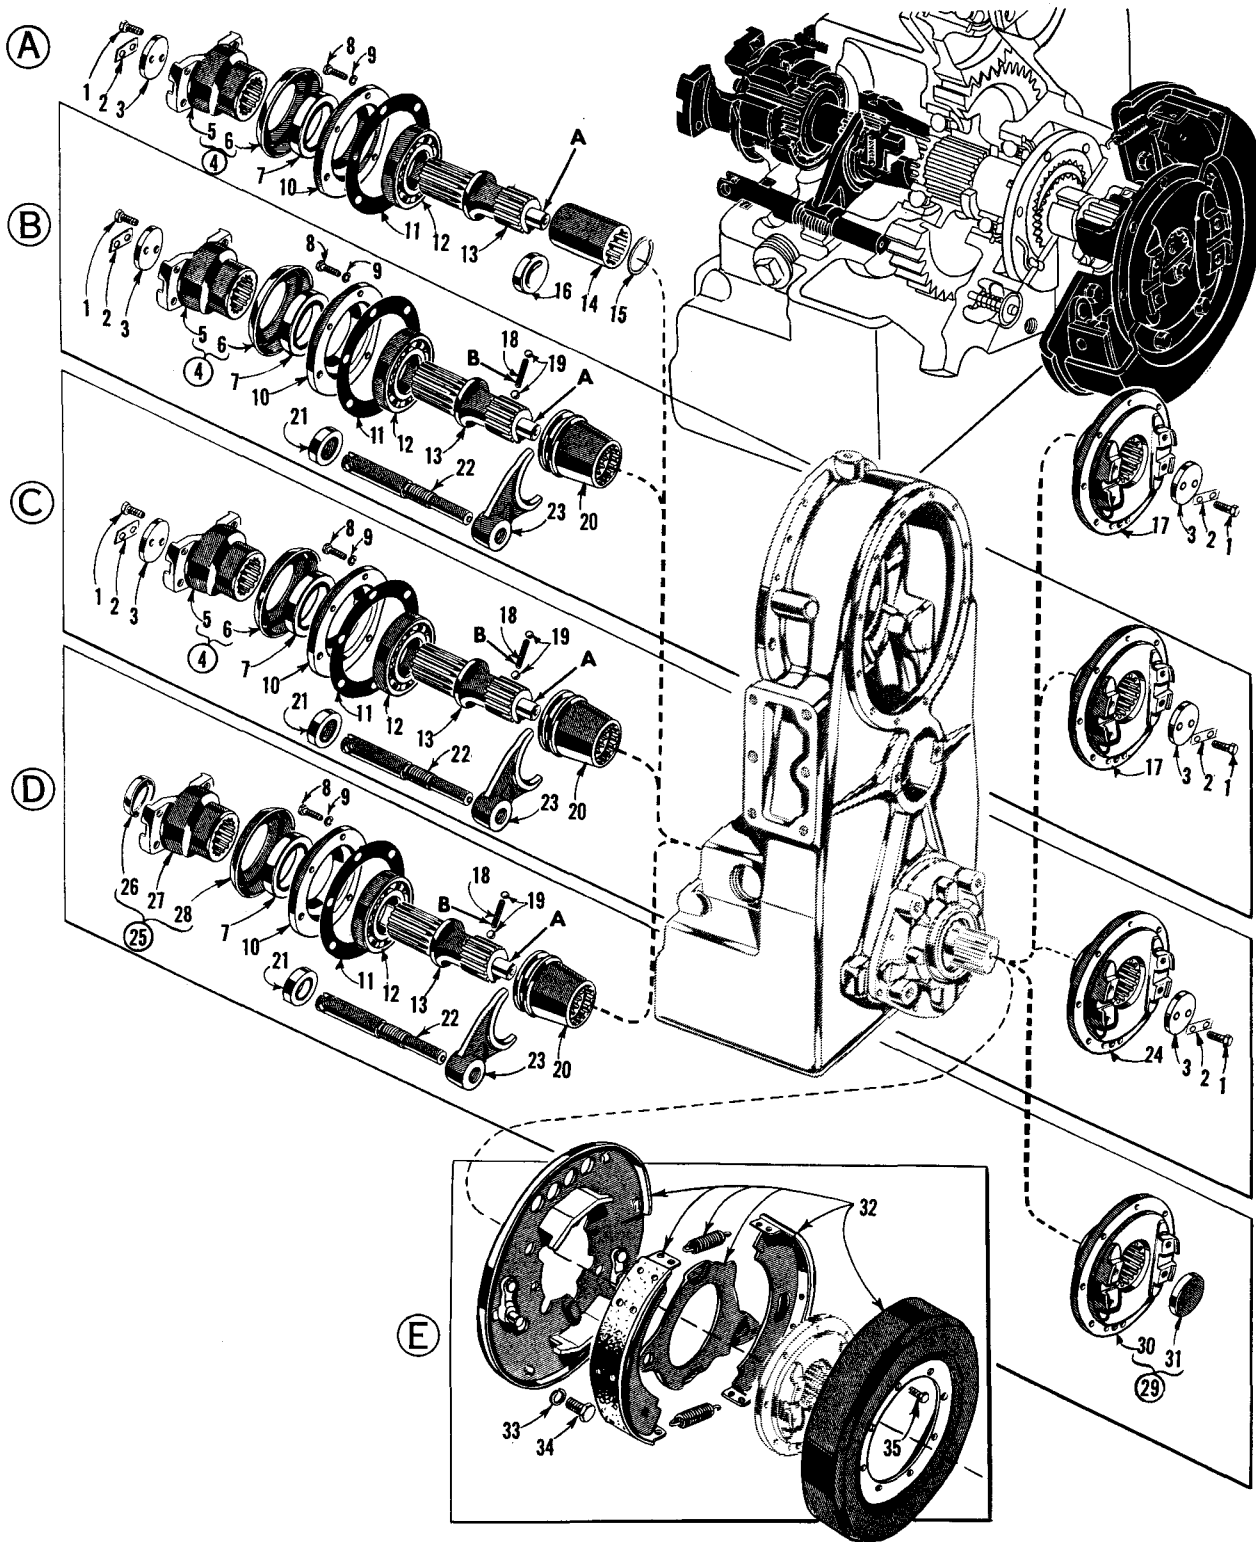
Front output shaft, disconnect flanges, and parking brake, exploded view
